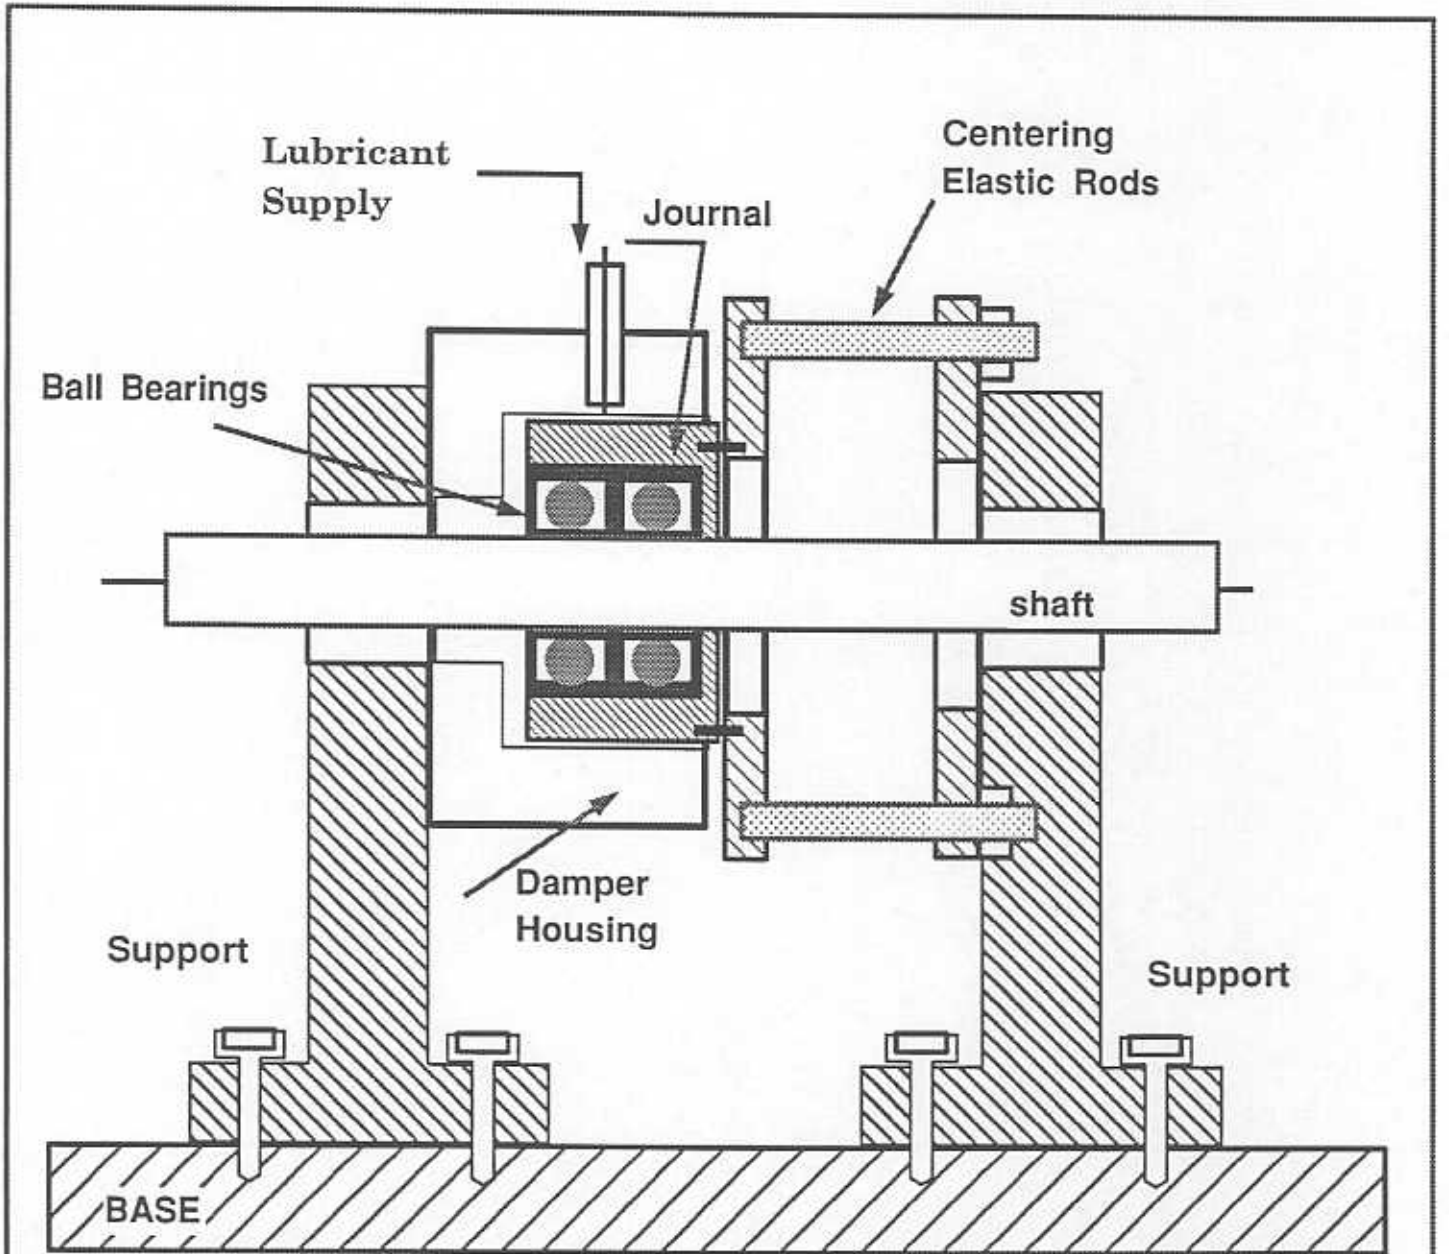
Squeeze Film Damper and Squirrel Cage Assembly.
